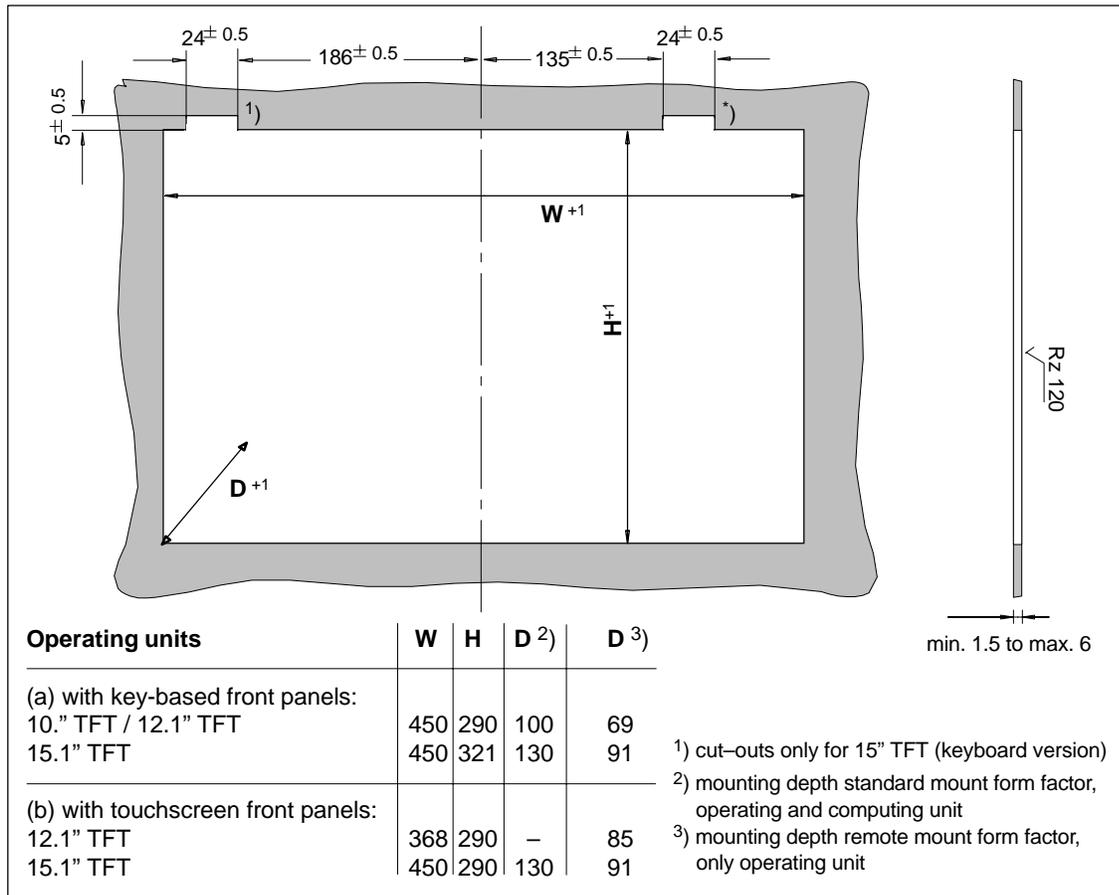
Mounting cut-out for standard mounting of Panel PC 870 (width x height x depth in mm)
